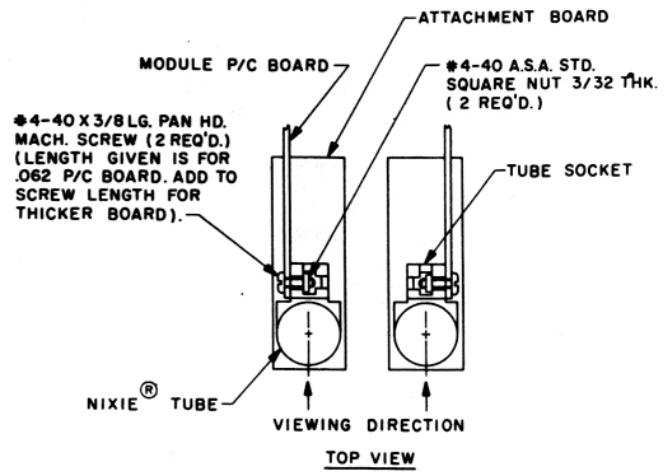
DRIVER MODULE BOARD RIGHT OR LEFT SIDE MOUNTING
